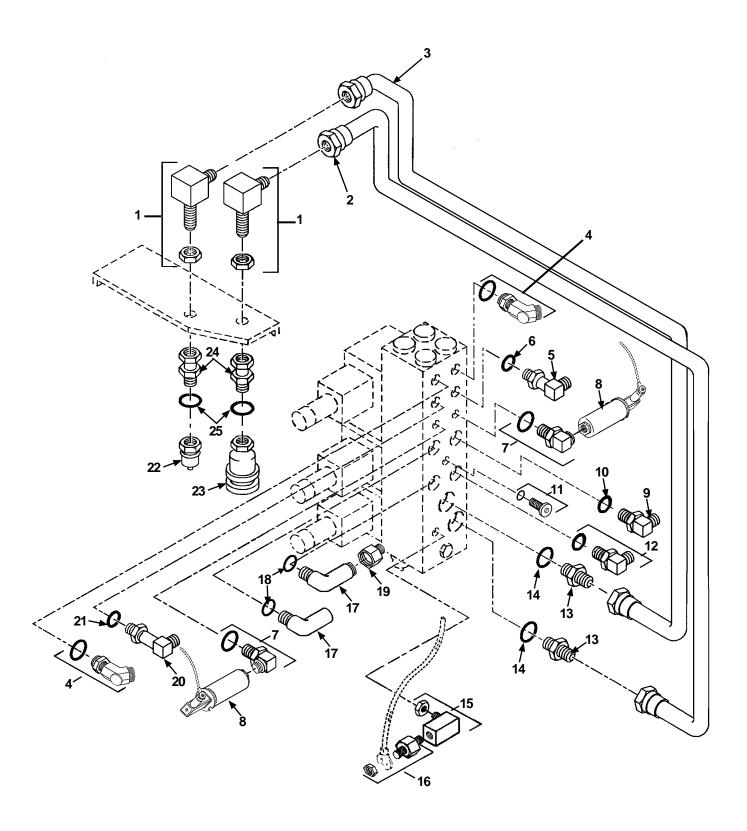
A. Main Hydraulic Manifold Fittings and Adapters (Model B Only)
